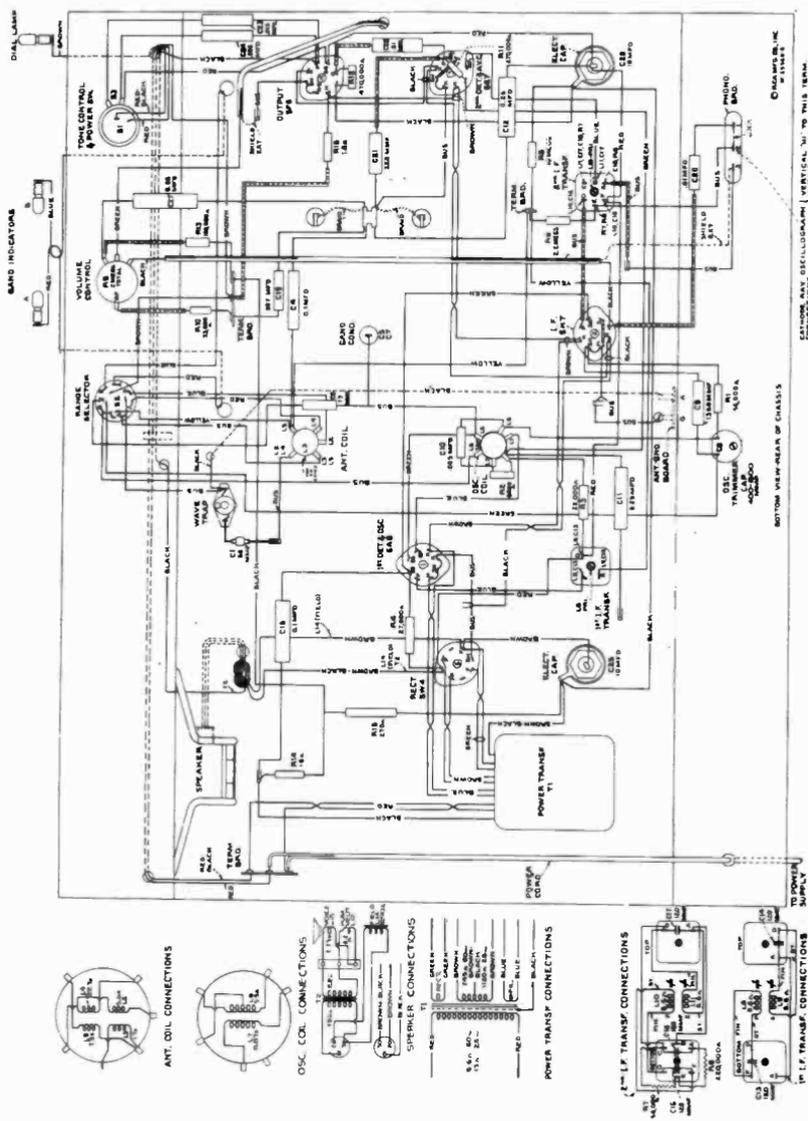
Layout drawing of the receiver whose schematic appears in Fig. 10.
